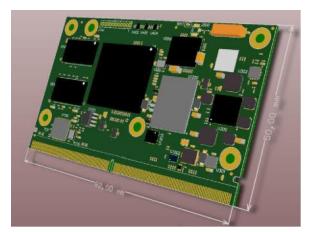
MitySOM-iMX6 Main Outline Dimensions
